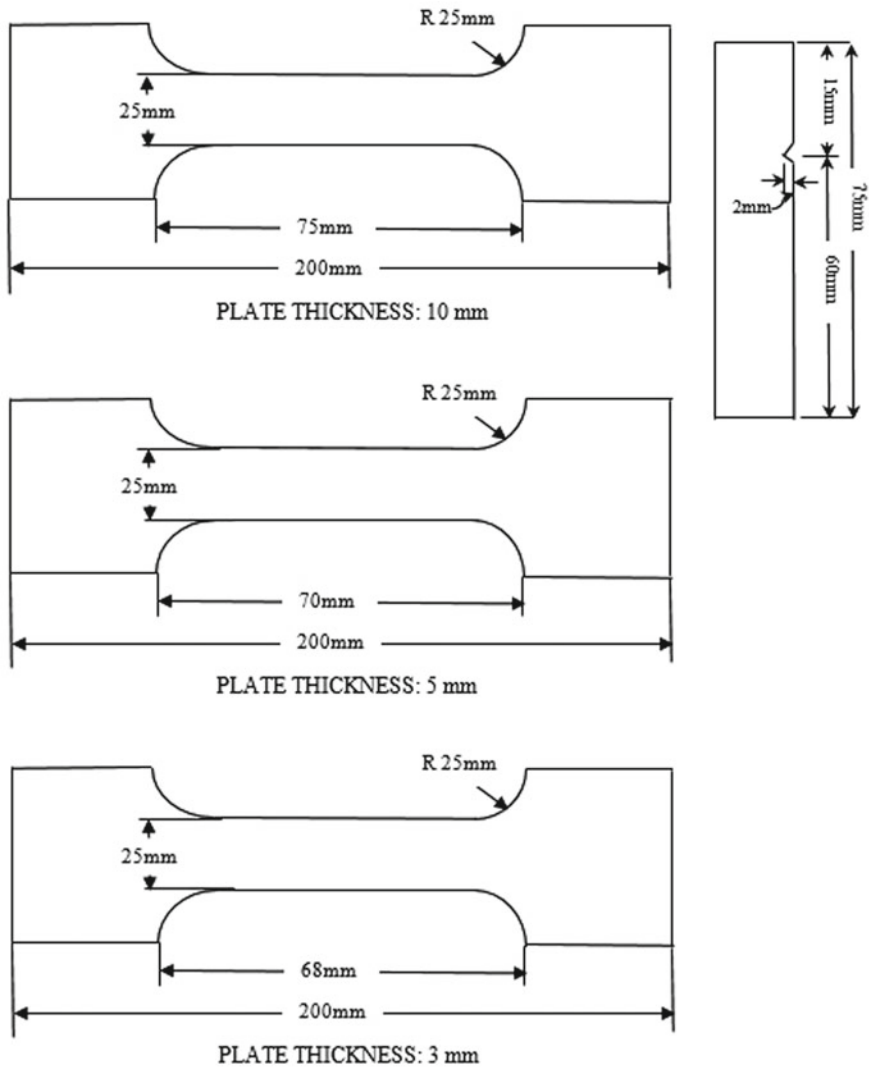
Schematic diagrams of a Tensile Test specimen; b Izod specimen
